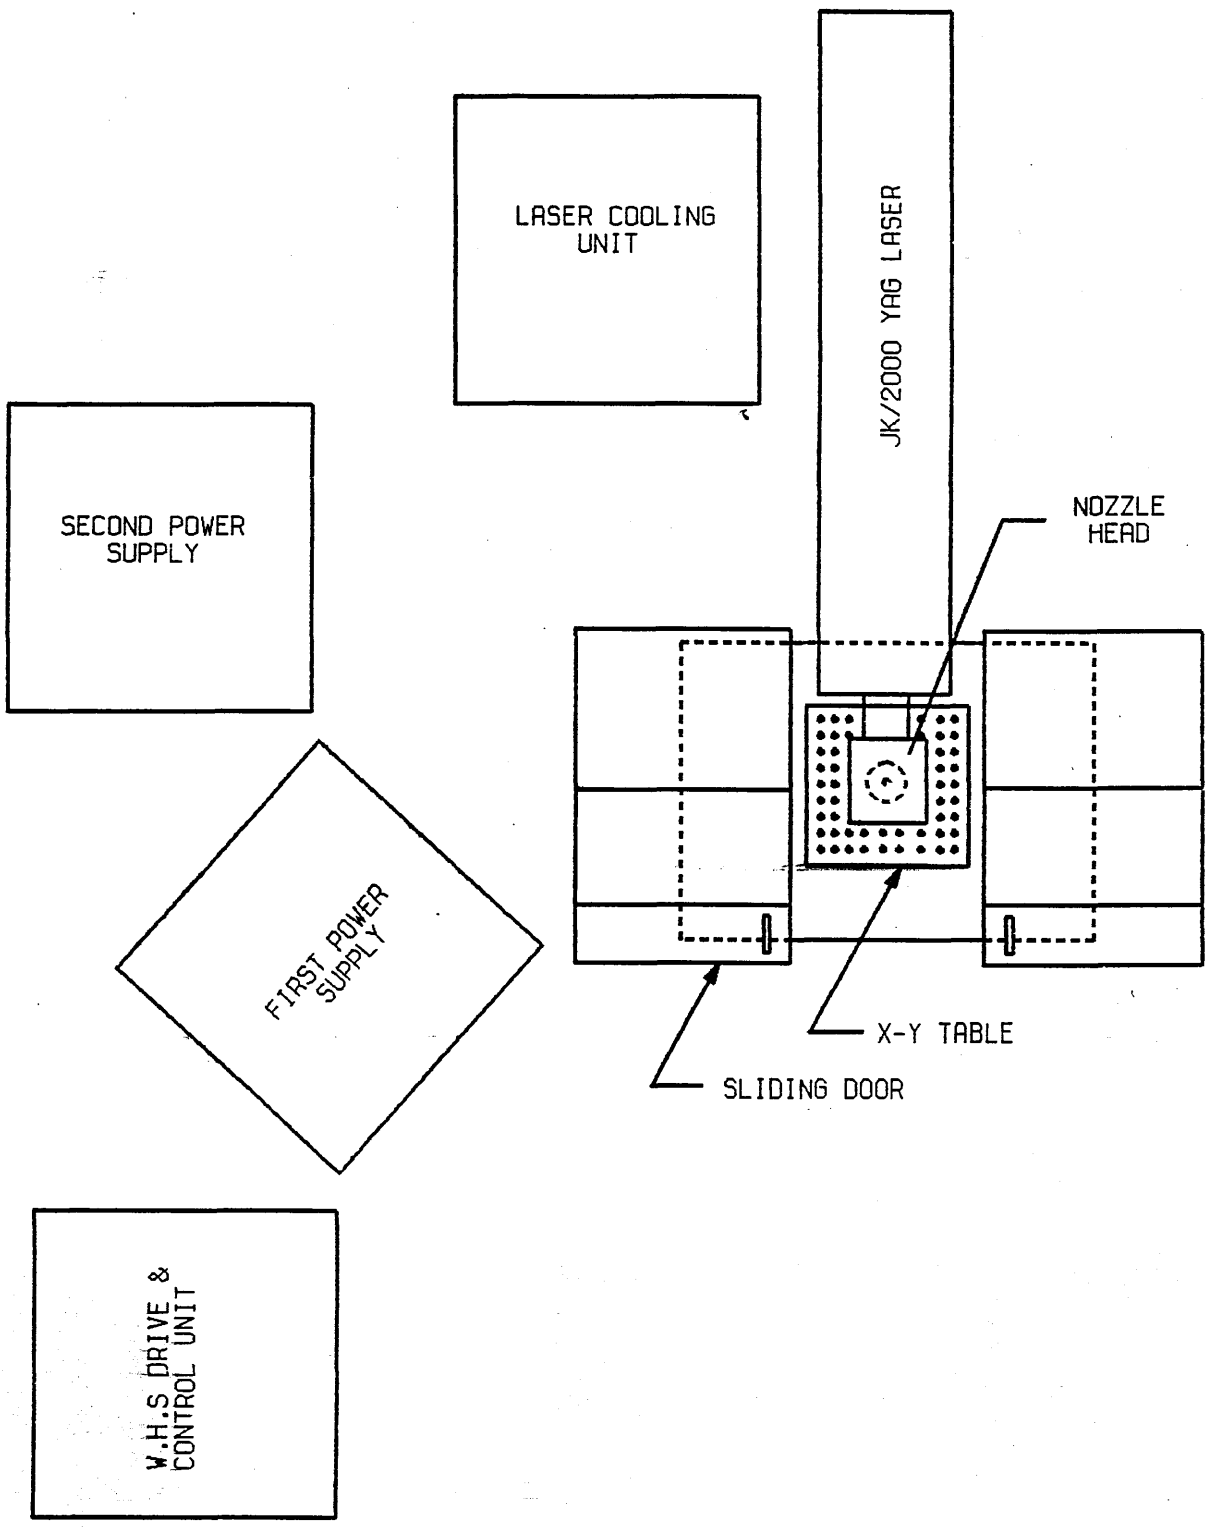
CONFIGURATION OF THE YAG LASER CUTTING MACHINERY
